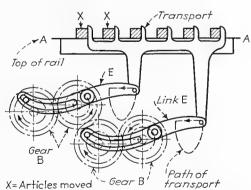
An arrangement of interconnected gears of equal diameters which will impart a transport motion to a mechanism, the gear and link mechanism imparting both the forward motion and the raising and lowering. The gear shafts are supported in the frame of the machine.
